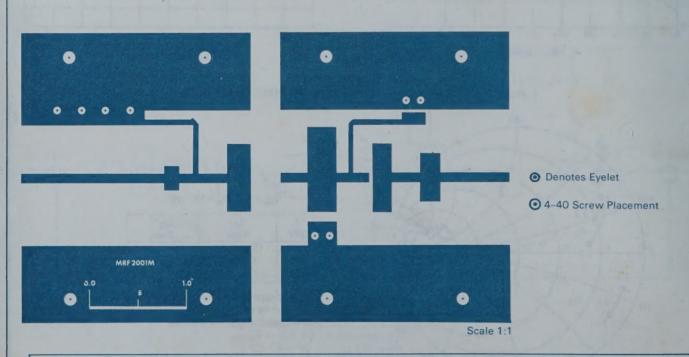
PRINTED CIRCUIT BOARD LAYOUT — 2.0 GHz TEST CIRCUIT
